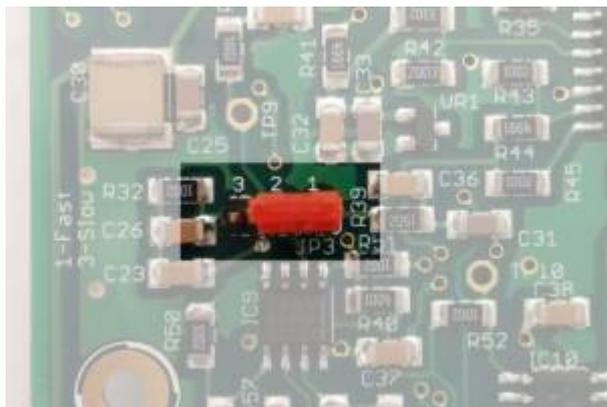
Jumper Pins 1& 2 to put piezo on Fast
